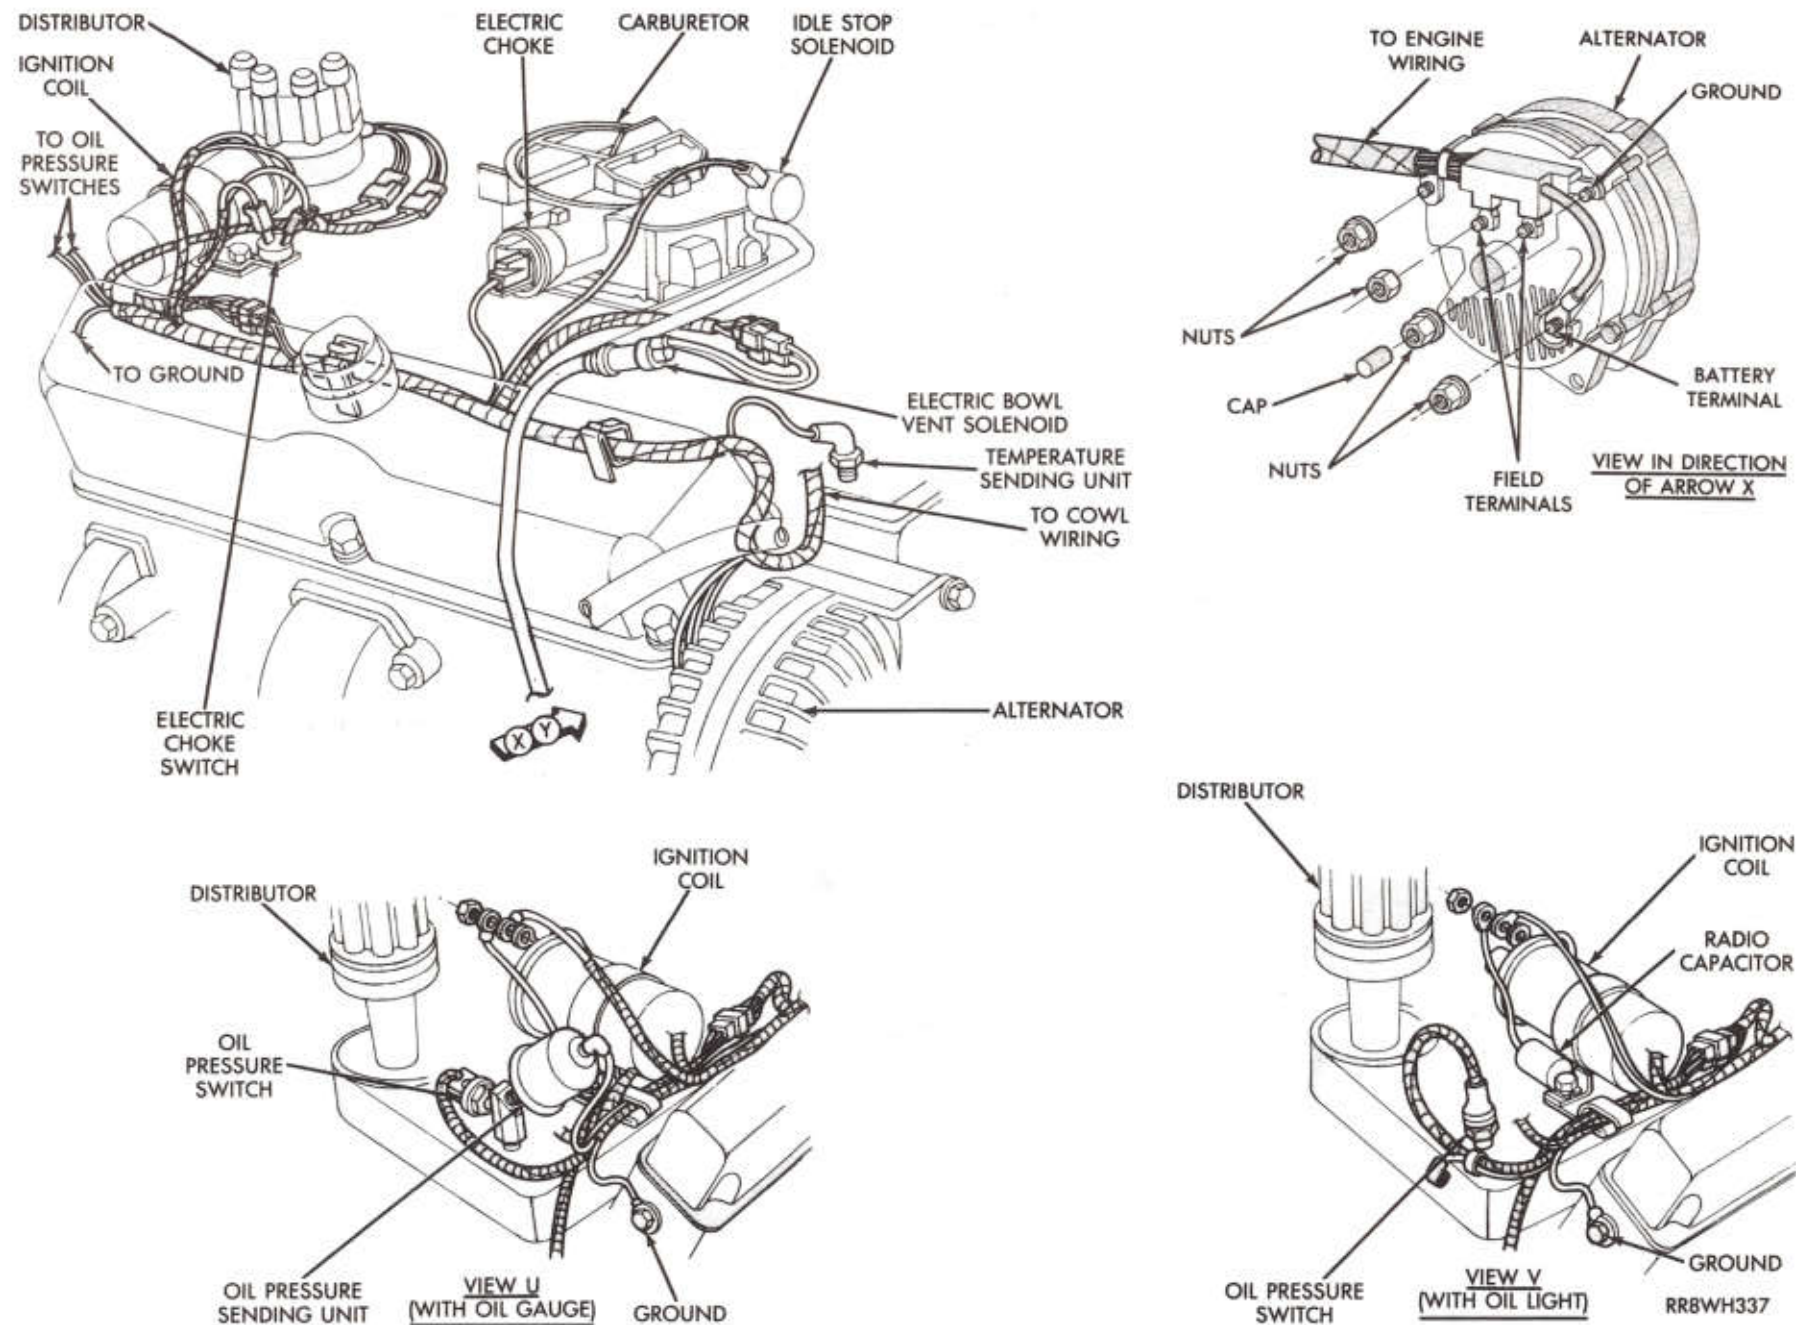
Engine Wiring and Component Identification 5.9L 4BBL 360 C.I.D. Engine with ECU Ignition
